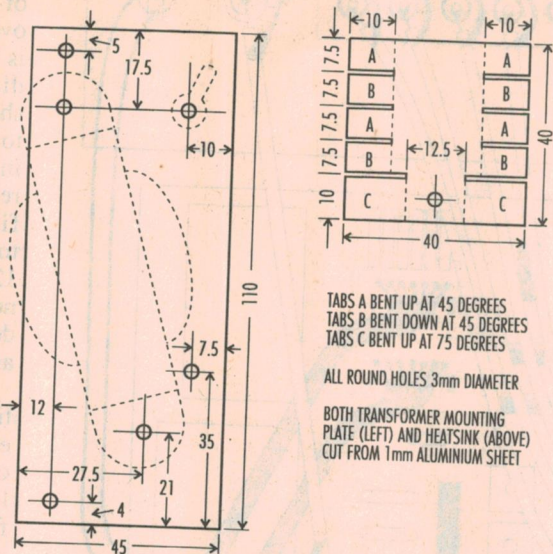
Here are the cutting and drilling details for the transformer mounting plate and regulator heatsink.
